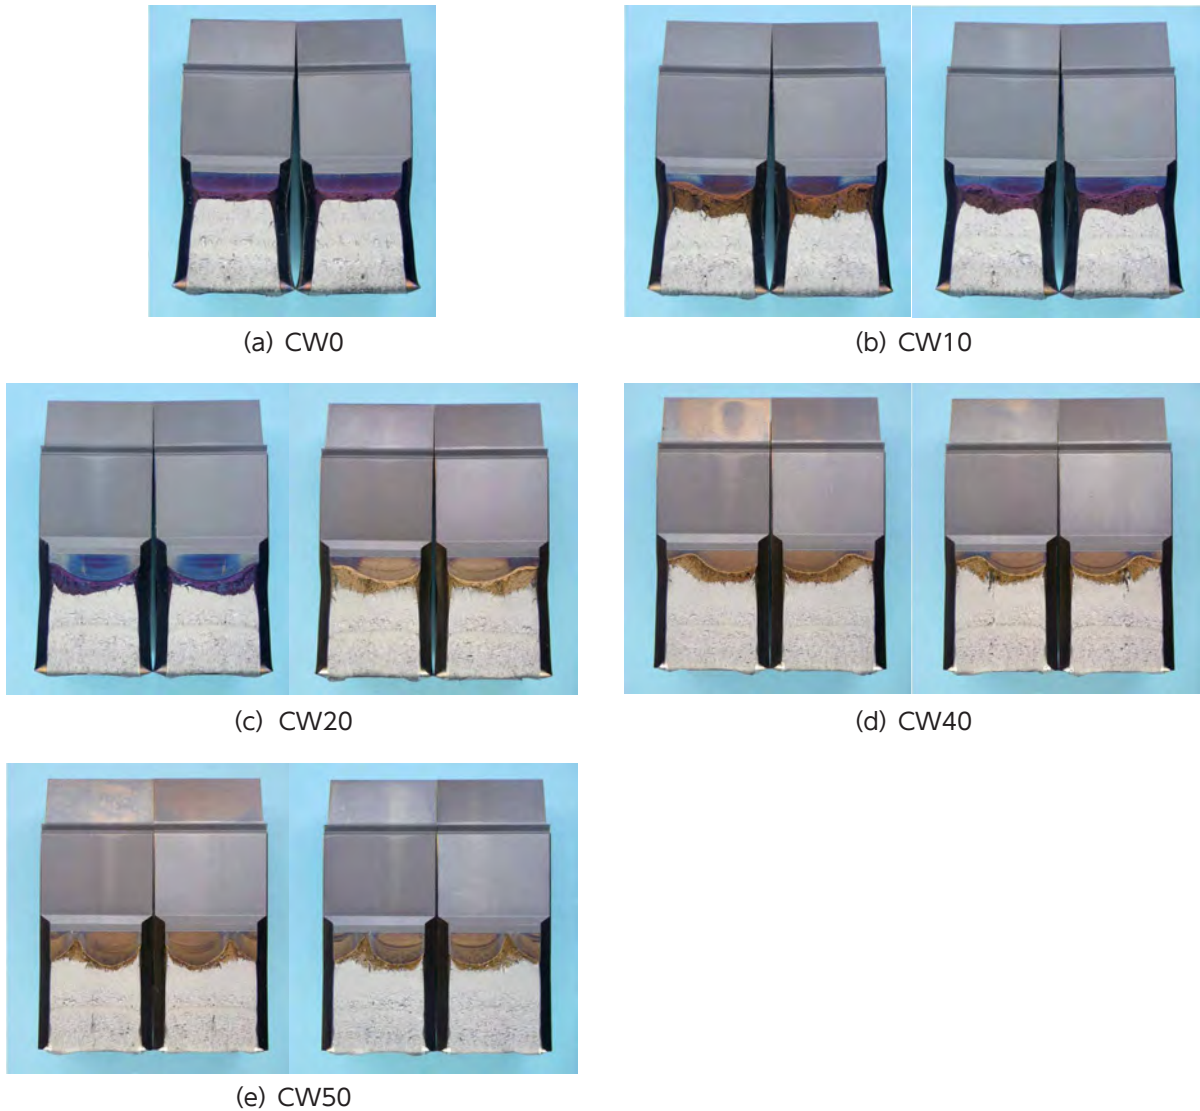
Fractured surfaces obtained by fracture toughness tests performed at room temperature. Duplicate tests were carried out for each degree of cold working except CW0.
